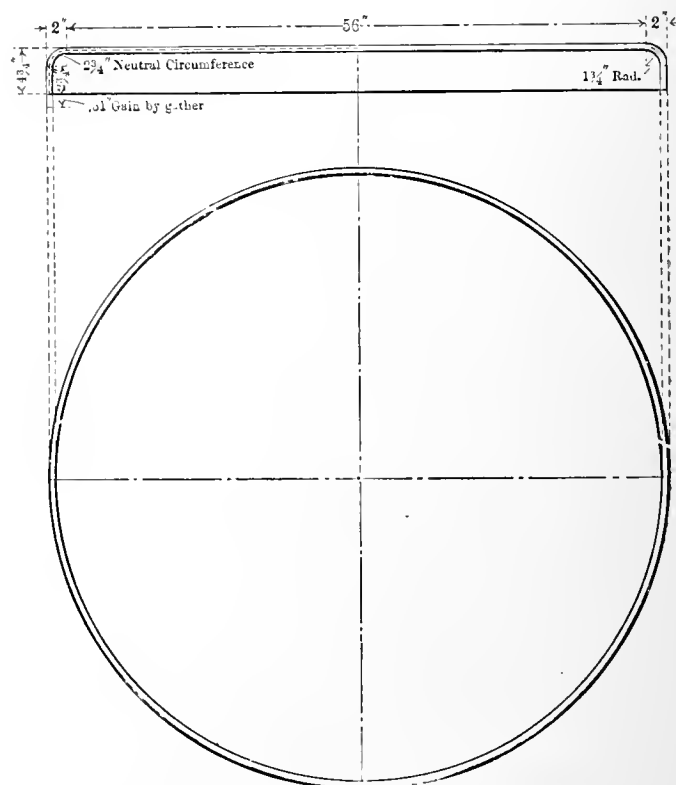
PLAN AND ELEVATION OF HEAD.
